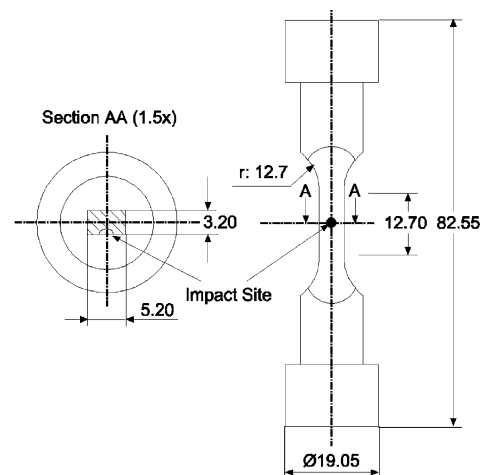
Tensile dogbone specimens in the so-called K_b geometry typically used to mimic the purely tensile fatigue loading condition of centrifugally-loaded rotating blades. All dimensions are in millimeters.
